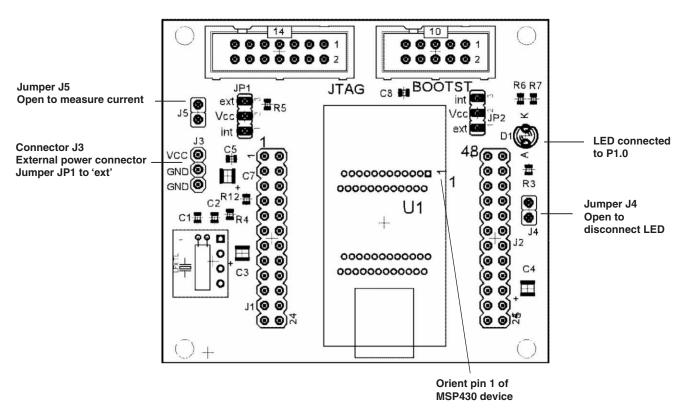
MSP-TS430DL48 Target Socket Module, PCB
